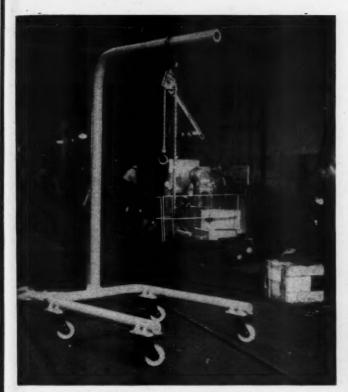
Portable lifting frame for handling engines, generators, compressors, etc.
